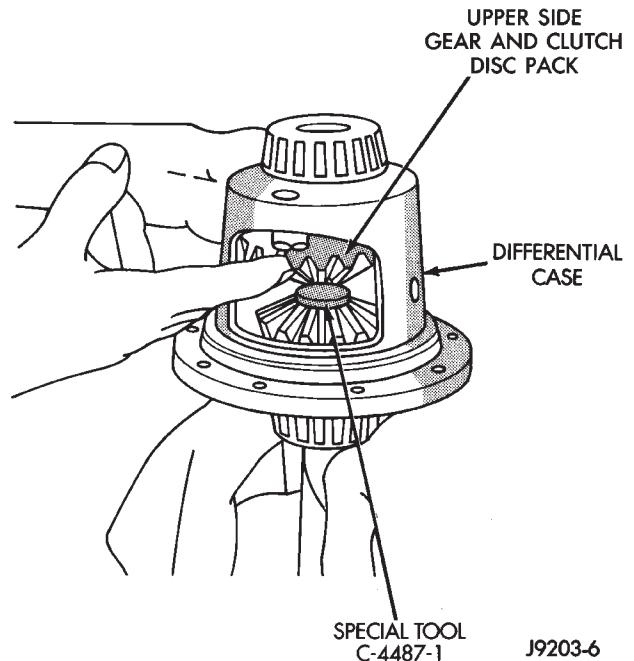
Upper Side Gear & Clutch Disc Pack Installation
